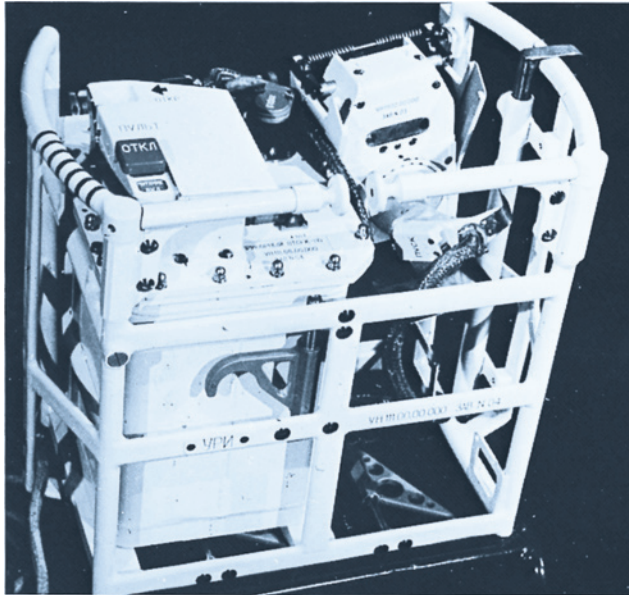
Machine designed to be used to weld in space.
